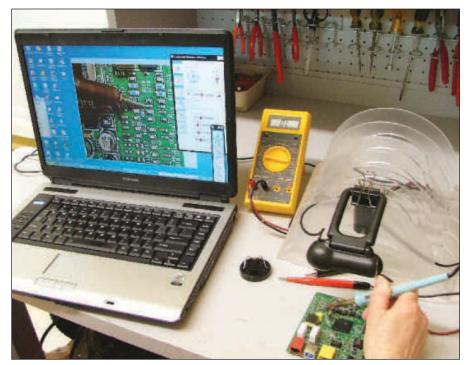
My hand holding a soldering iron to one end of a component. On the laptop screen you can plainly see the tip of the iron against this tiny part.
